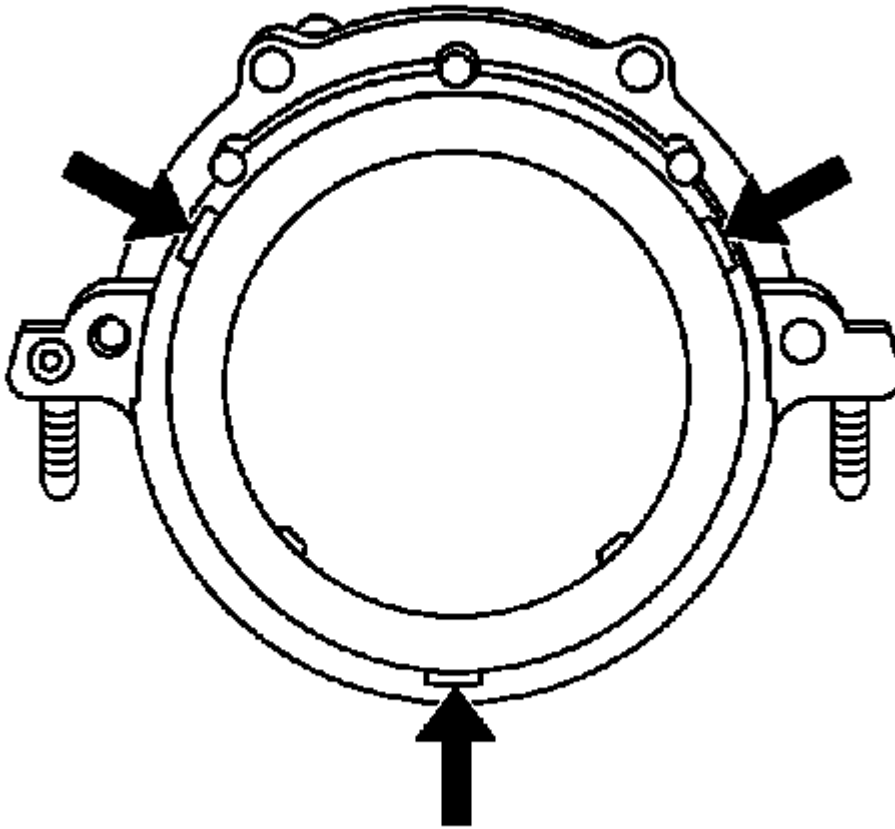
Locating Crankshaft Rear Oil Seal Access Notches
